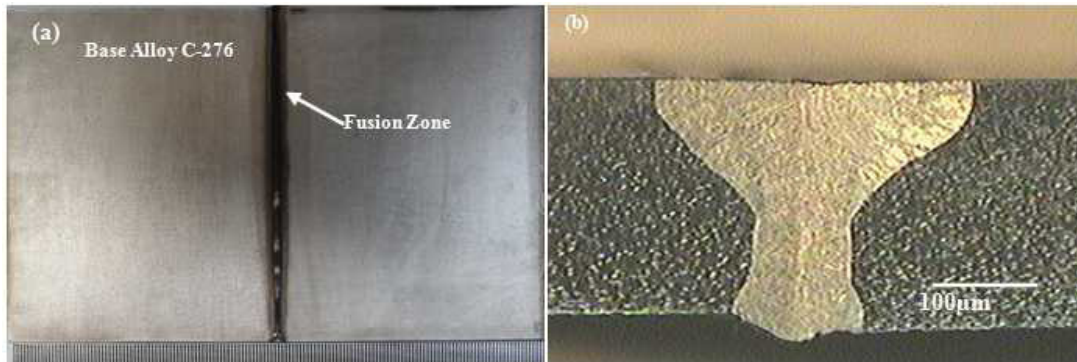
(a) Photograph of weld joint; (b) Macrostructure of 550mm/min with 2 KW laser Welded alloy C-276
